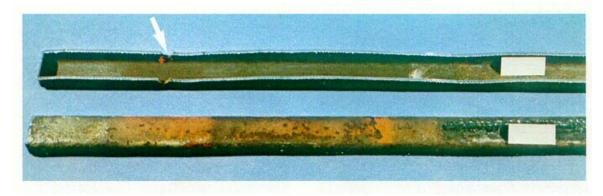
Tube with closed ends, one of which is bolted (First inspection programme)
